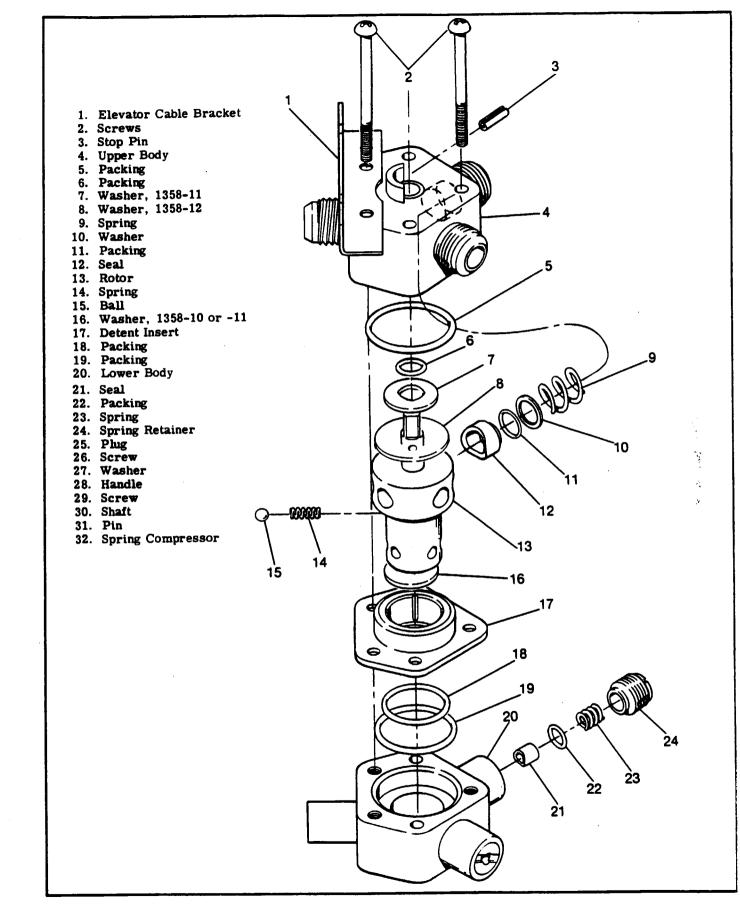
Fuel Selector Valve (Sheet 1 of 2)
